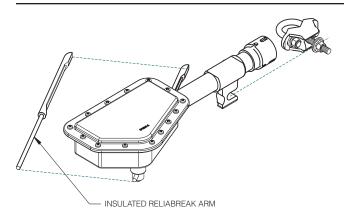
Exploded view of Reliabreak including insulated Reliabreak arm
